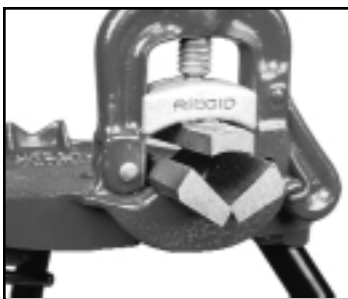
Manufacturer's adapters used with pipe vise to protect PVC-Coated conduit. (Courtesy of ROBROY Industries Conduit Division)
